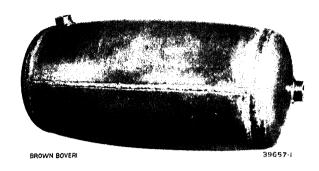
Compressed-air tank of an air-blast, high-speed circuit breaker after an internal-pressure test at 104 kg/cm² gauge, with considerable deformation but without cracks.
